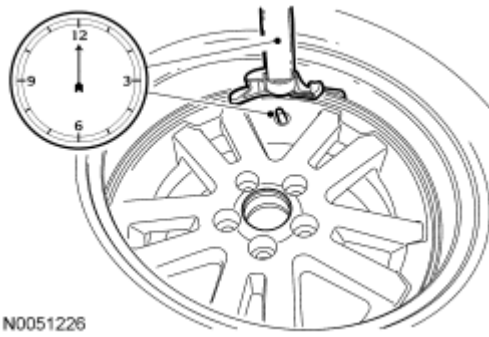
Identifying Alignment Position Of Valve Stem With Machine Arm (Bottom Bead Of Tire)
